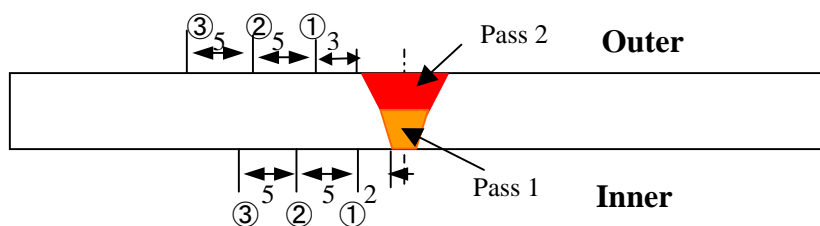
Weld pass and locations of temperature measurements.
